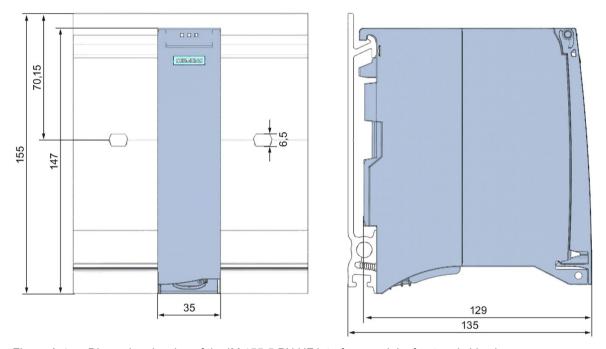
Dimension drawing of the IM 155-5 PN HF interface module, front and side views
